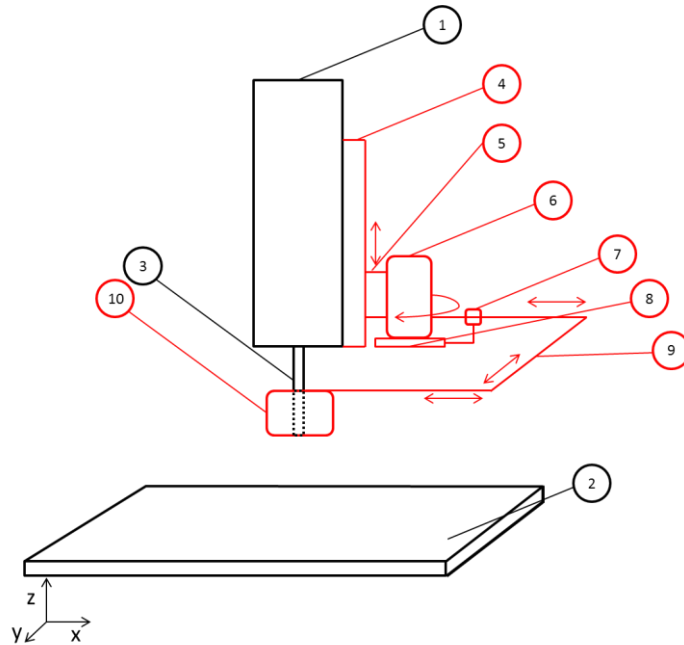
Mechanical sensor integration schema: point 1 represents the machine tool Z axis, point 2 represents the machine tool work plate, point 3 represents the machine tool end effector, point 4 represents a rail which is directly fixed on the machine tool axis, point 5 represents the slider which is able to move along the aforementioned rail, point 6 represents a pneumatic rotating actuator which is capable of move the connected arm around its rotational axis, point 7 represents a mechanical conical adjustable jig able to ensure the motion accuracy and repeatability, point 8 represents the fixed plate on which the fixed part of the jig is mounted, point 9 represents the mechanical arm that carries the sensor and point 10 represents an optical acquisition sensor able to acquire data on any work piece being machined.
